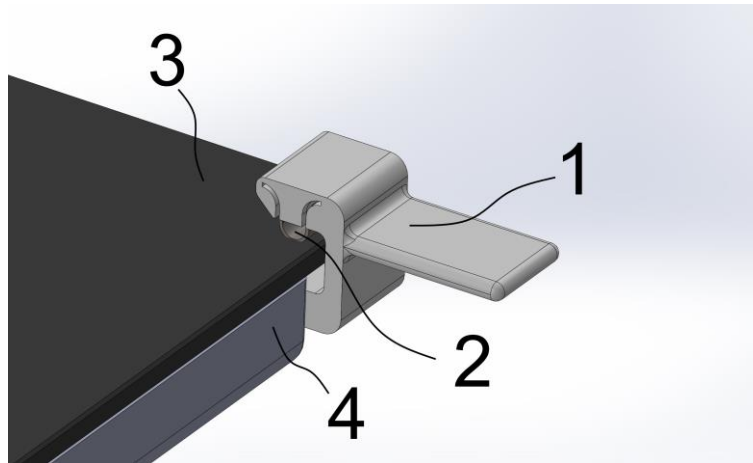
Overview of the clamping mechanism. Clamp body(1), Flexible member (2), Build plate (3), Build plate carrier (4)
